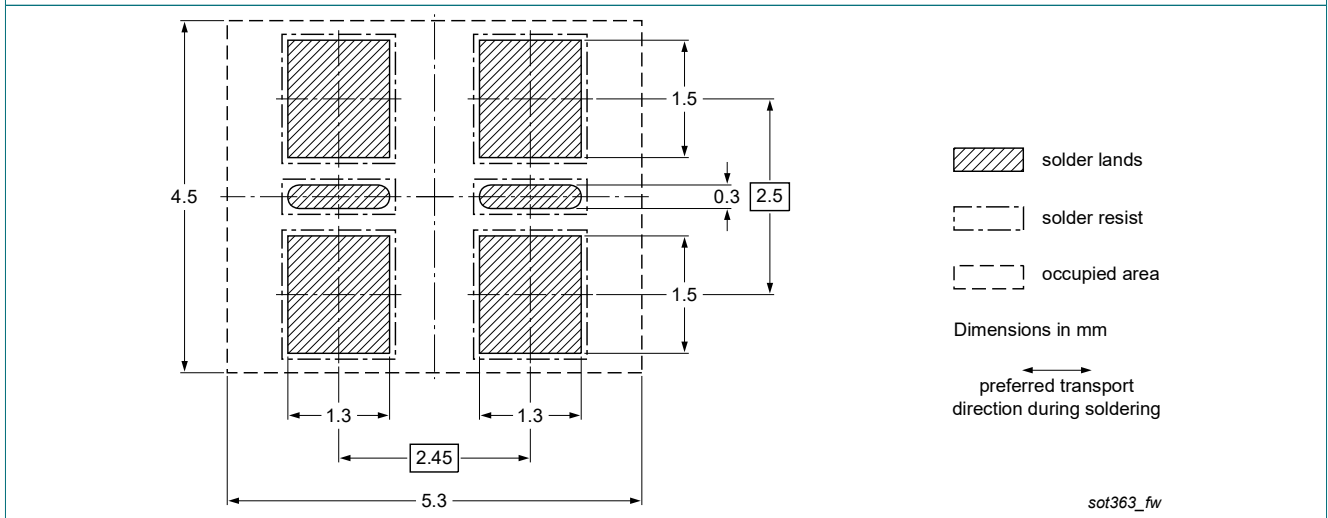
Wave soldering footprint for TSSOP6 (SOT363)
